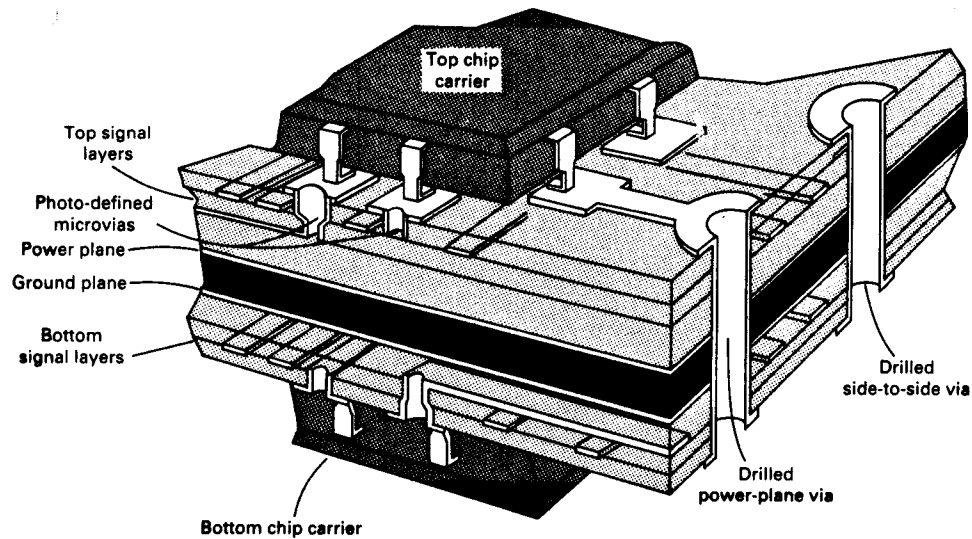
Cut-away View of a Printed Wiring Assembly
